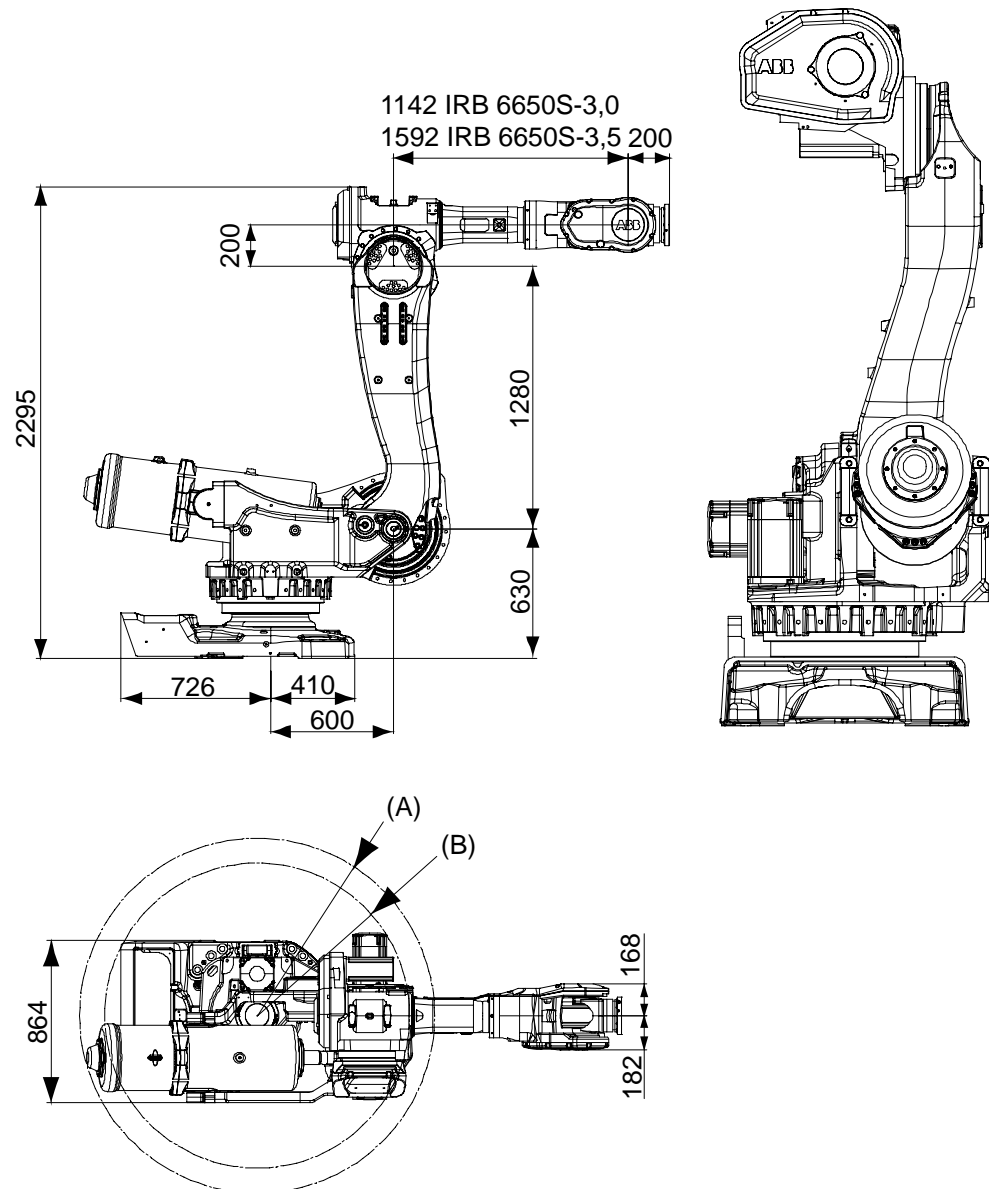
View of the IRB 6650S Manipulator from side and above (dimensions in mm). Allow 200 mm behind the manipulator foot for DressPack.
